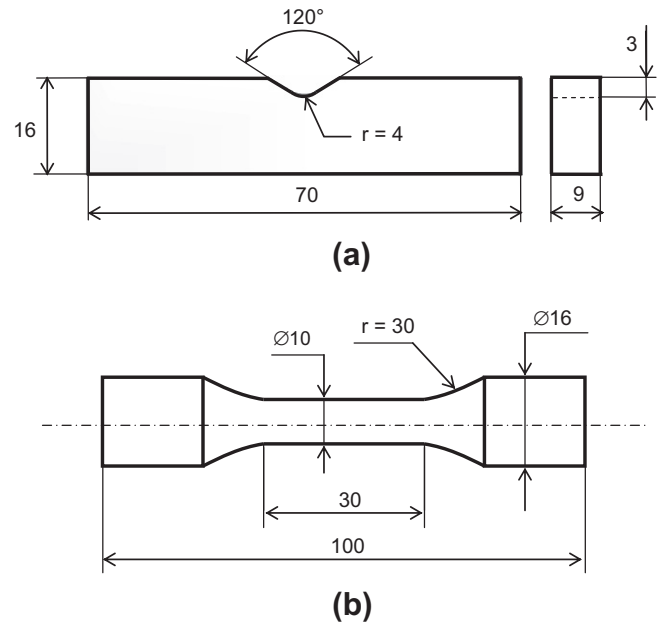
Geometry and dimensions (in mm) of two fatigue specimens: (a) notched specimen ( $K_t \approx 1.6$ ) used in HCF tests under both 3-point and 4-point bending configurations and (b) smooth specimens used in LCF tests under reversed tension-compression.
